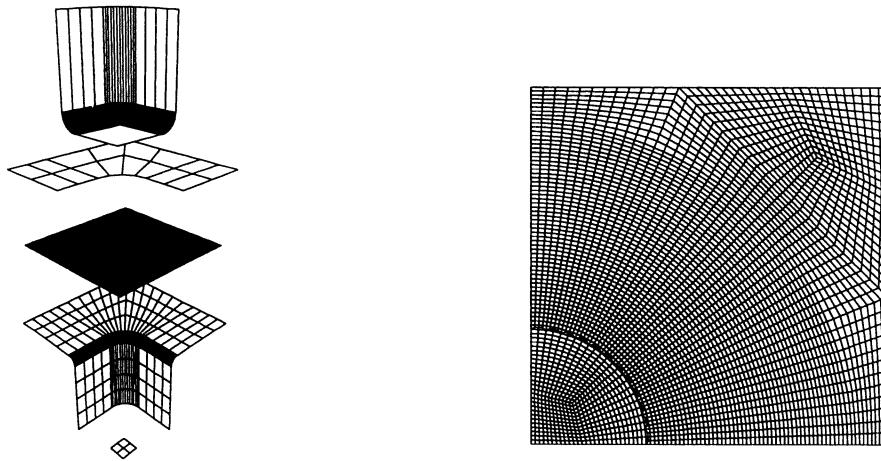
The discretized model consisting of punch, blank holder, blank and die. The small part shown in the bottom is made to ensure the position of the drawn workpiece when eliminating the remaining contact surfaces. The right part shows the discretization of the blank.
